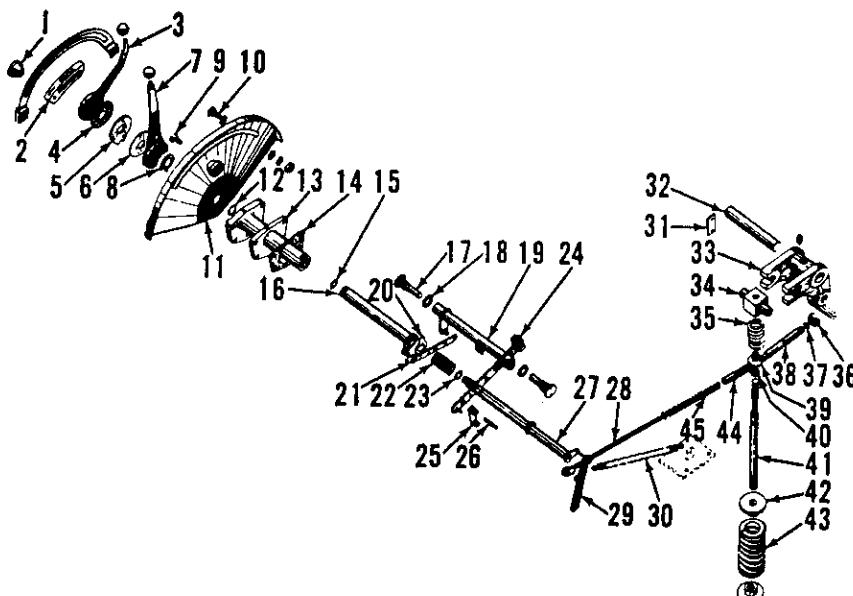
Exploded view of control levers, quadrant and the draft and position control linkage.
